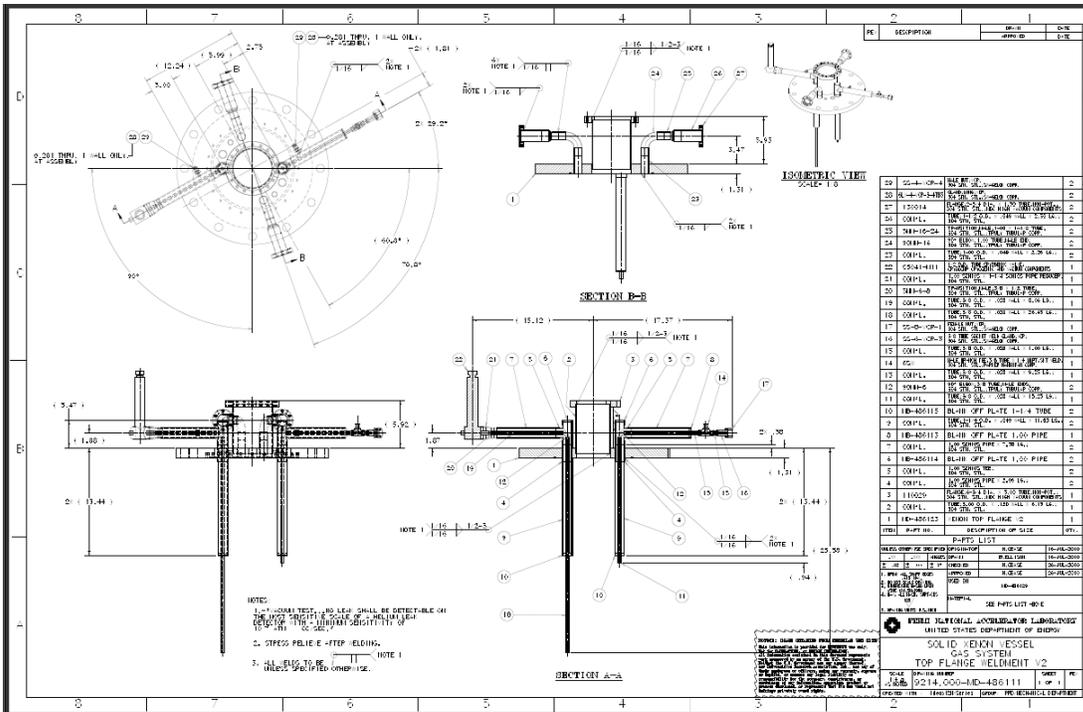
Drawing 486123, Solid Xenon top flange weldment
